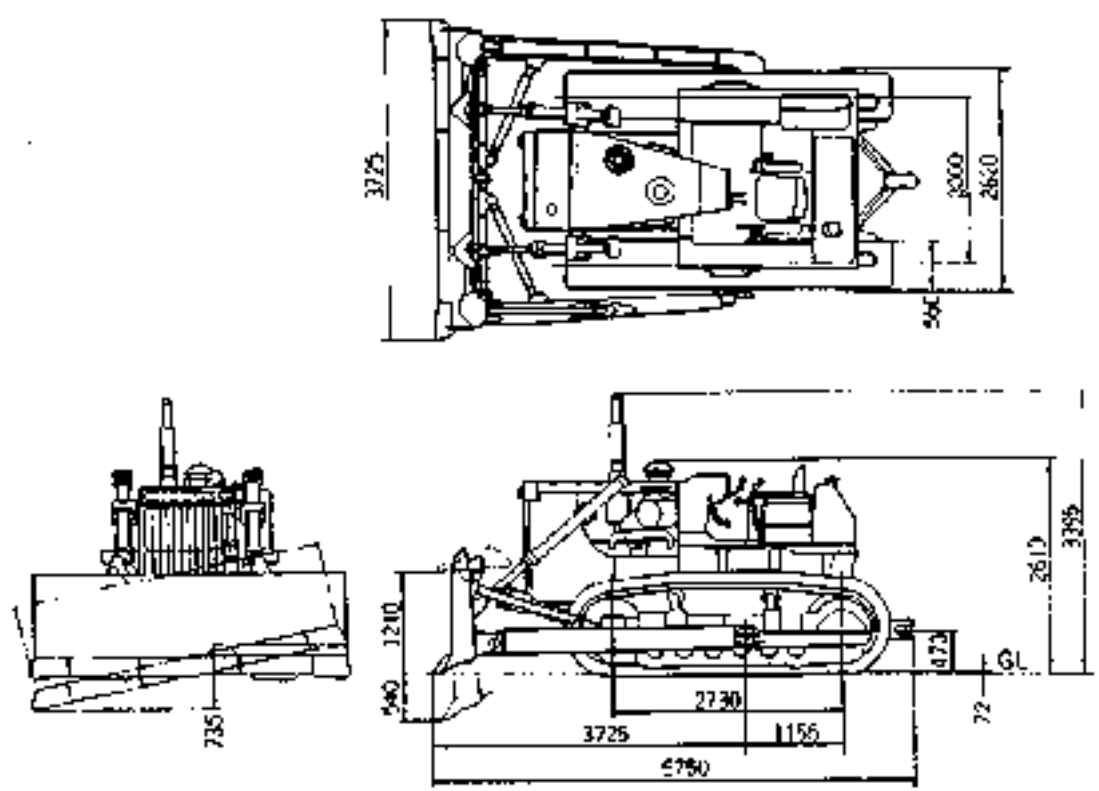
Overall dimension of PD220Y-1 bulldozer
